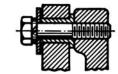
Fig. 136. Fig. 135.—Shouldered bushing centered in counterbored hole.
